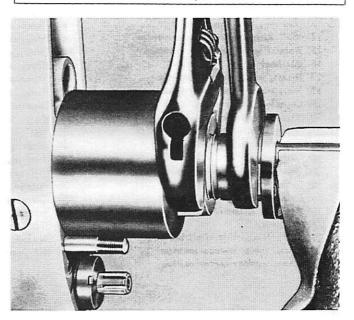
B. Removing Drive Shaft and Water Pump Cartridge
